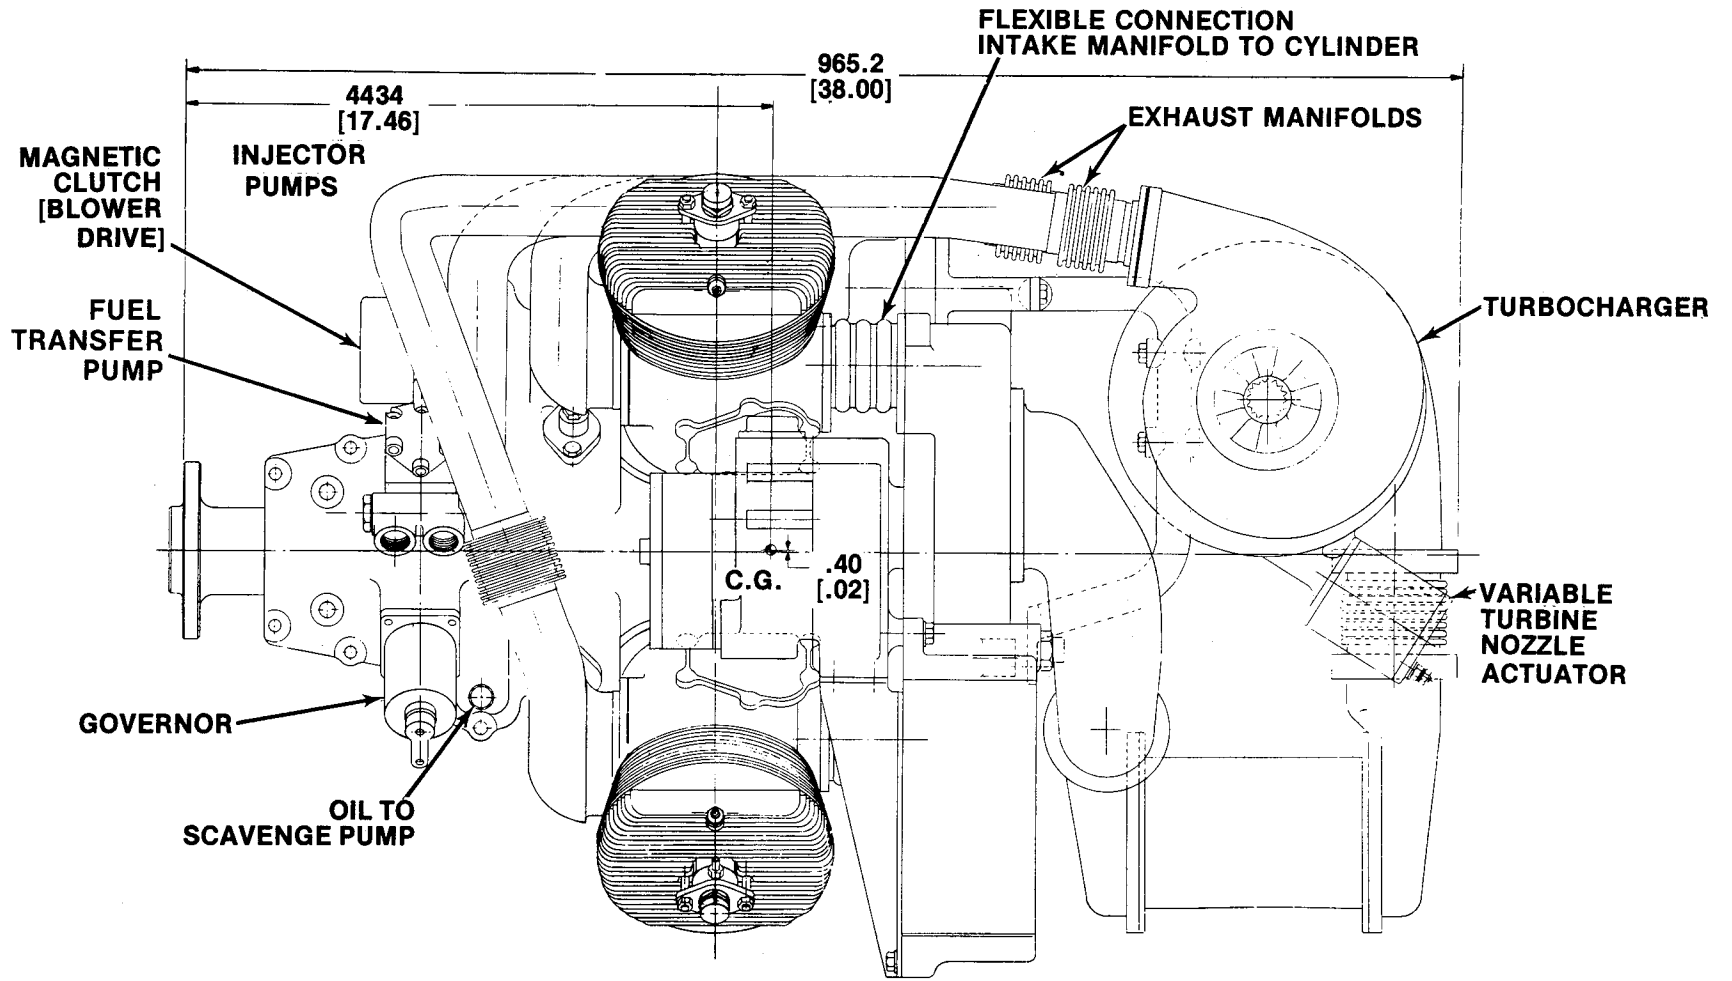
149 kW AIRCRAFT DIESEL—SIDE VIEW
